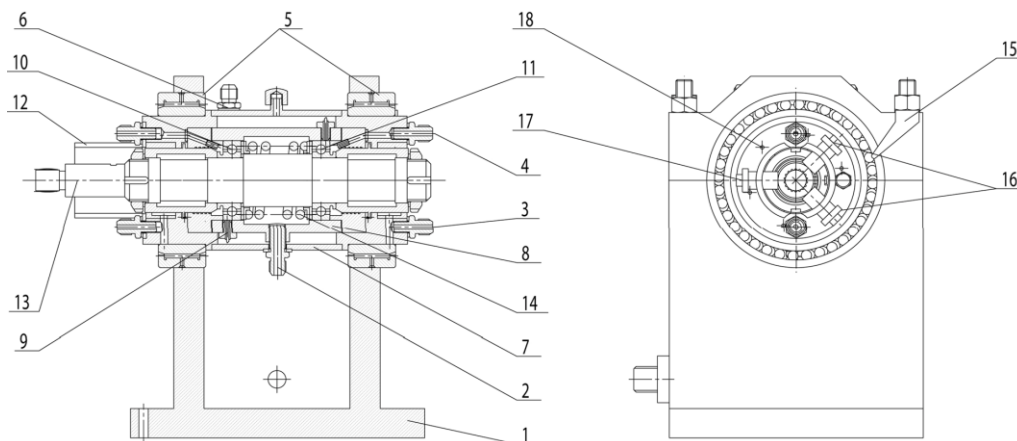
Block of tested bearings: 1 - bearing block housing; 2 - oil outlet; 3 - air supply to create a radial force; 4 - oil supply; 5 - thrust bearings; 6 - fitting for air supply for bearing heating; 7 - heating casing; 8 - bearing housing; 9 - thermocouple; 10, 11 - tested bearings; 12 - body of sensors; 13 - shaft; 14 - spring; 15 - retainer; 16 - rotor oscillation sensors; 17 - speed measurement sensor
